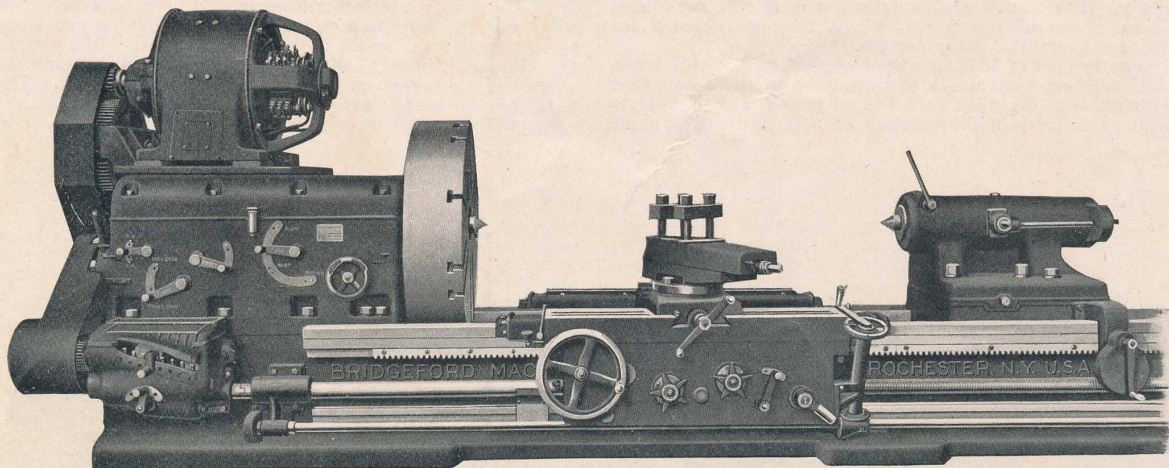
BETTS-BRIDGEFORD HEAVY DUTY GEARED HEAD SCREW CUTTING LATHE, TYPE A1200
